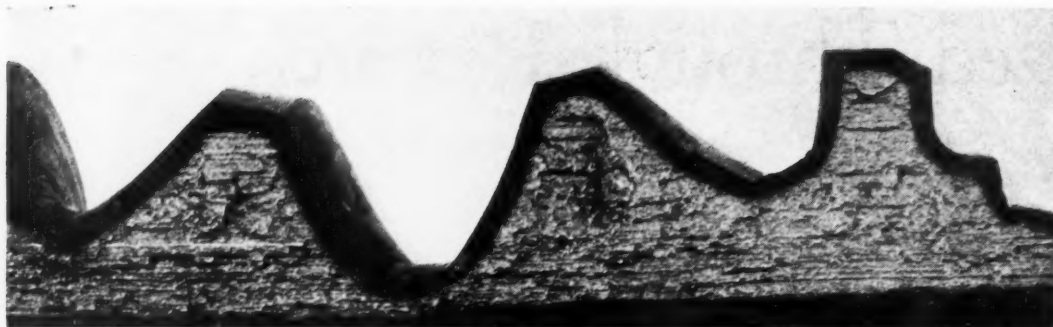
Section of a Steering Gear Worm, Showing the Carburized Case
